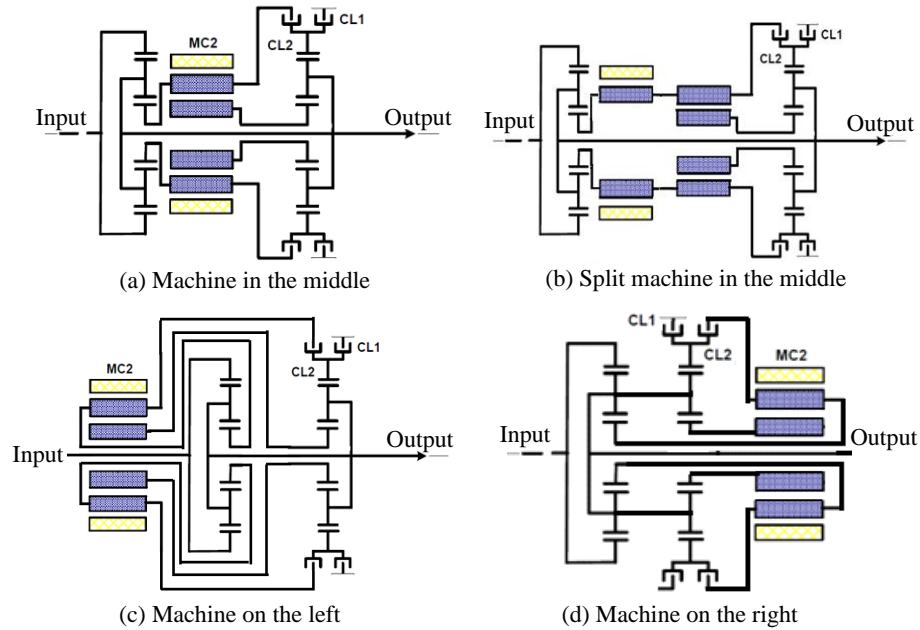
Mechanical embodiments of the integrated electro-mechanical hybrid transmission with external stator
